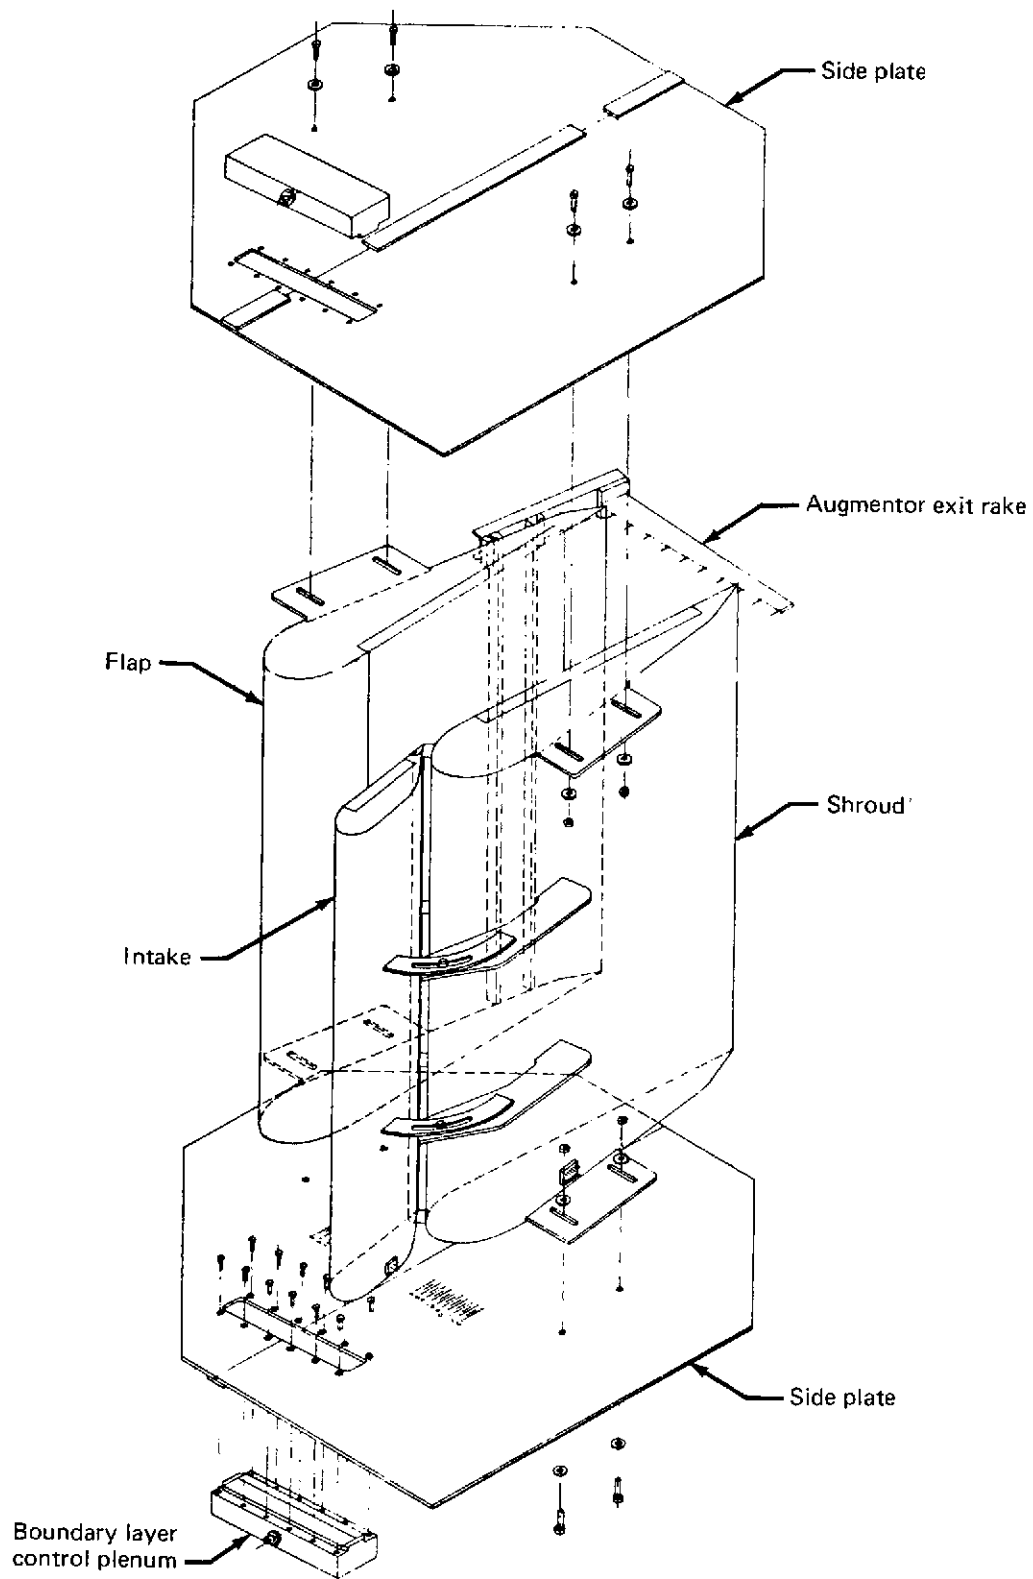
FLAP SYSTEM ASSEMBLY
